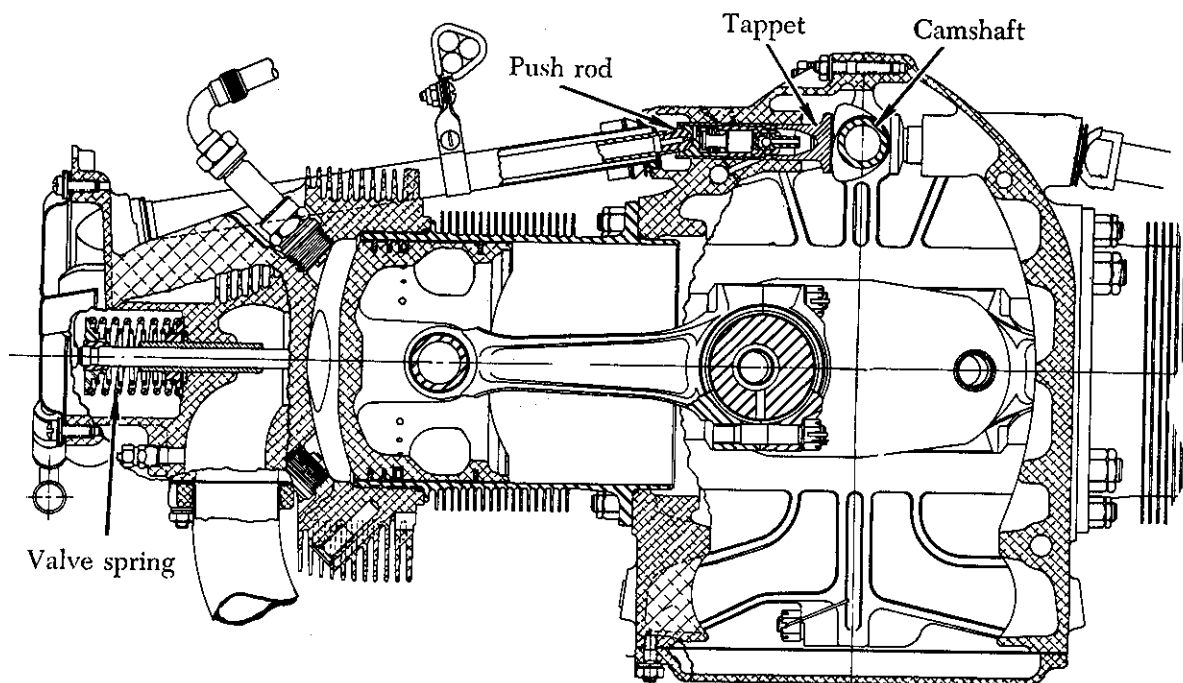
Valve-operating mechanism (opposed engine).
